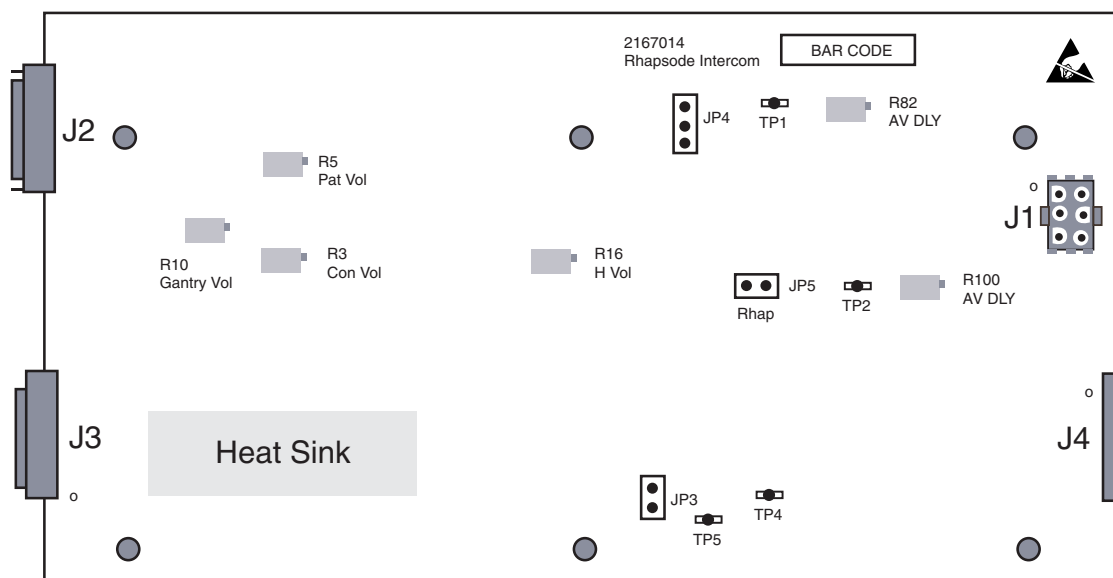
Console Intercom Board (2167014) Physical Layout
